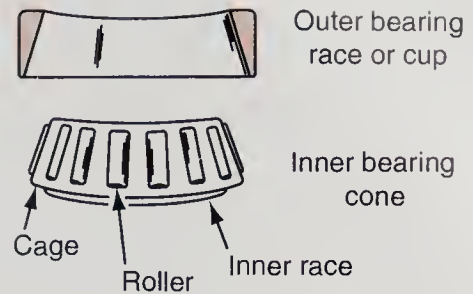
The outer race or cup is a separate part of a tapered roller bearing. The remaining parts are combined in one assembly.
